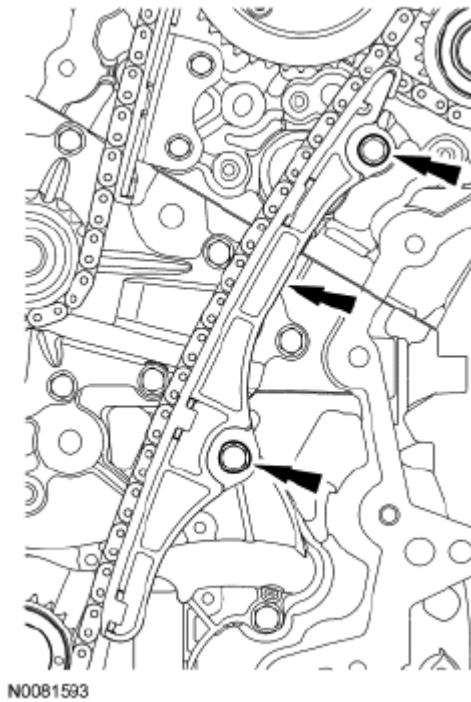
Locating Lower LH Primary Timing Chain Guide And Bolts
